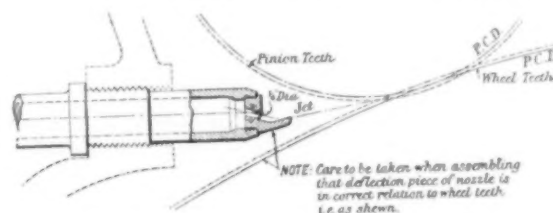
SPRAYER FOR LUBRICATING GEARING TEETH
